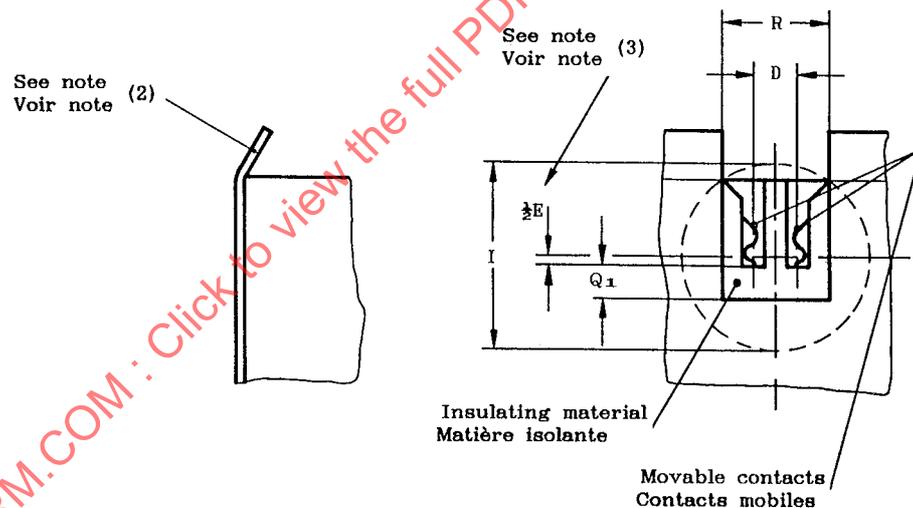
CONTACT ASSEMBLY WITH PARALLEL SLIDE-IN GROOVES
